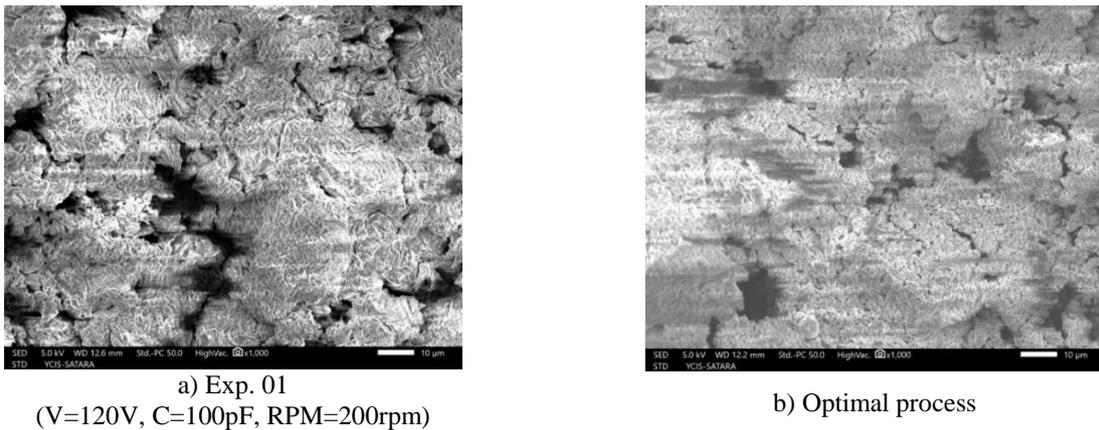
Micro-cracks on machined surface in  $\mu$ -EDM
